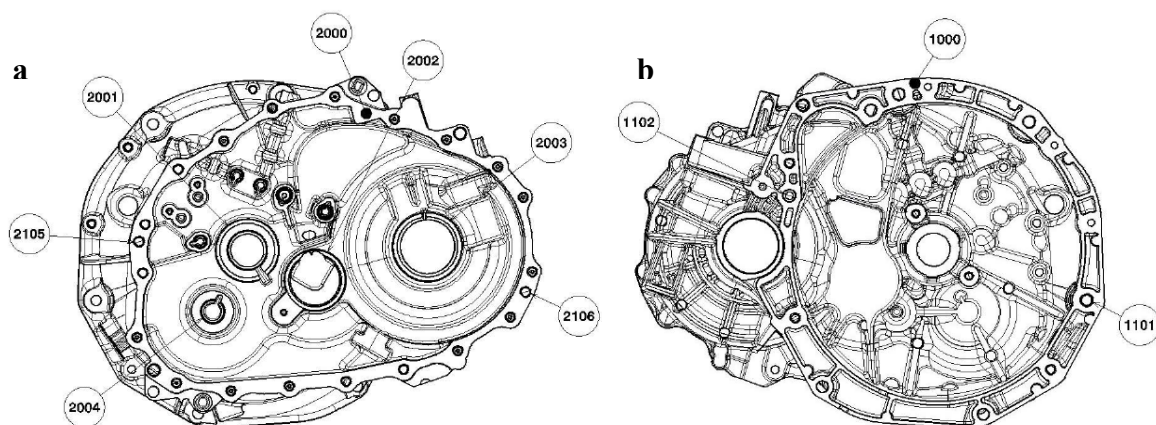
Surface: a) mechanism of gear box, b) engine of gear box
